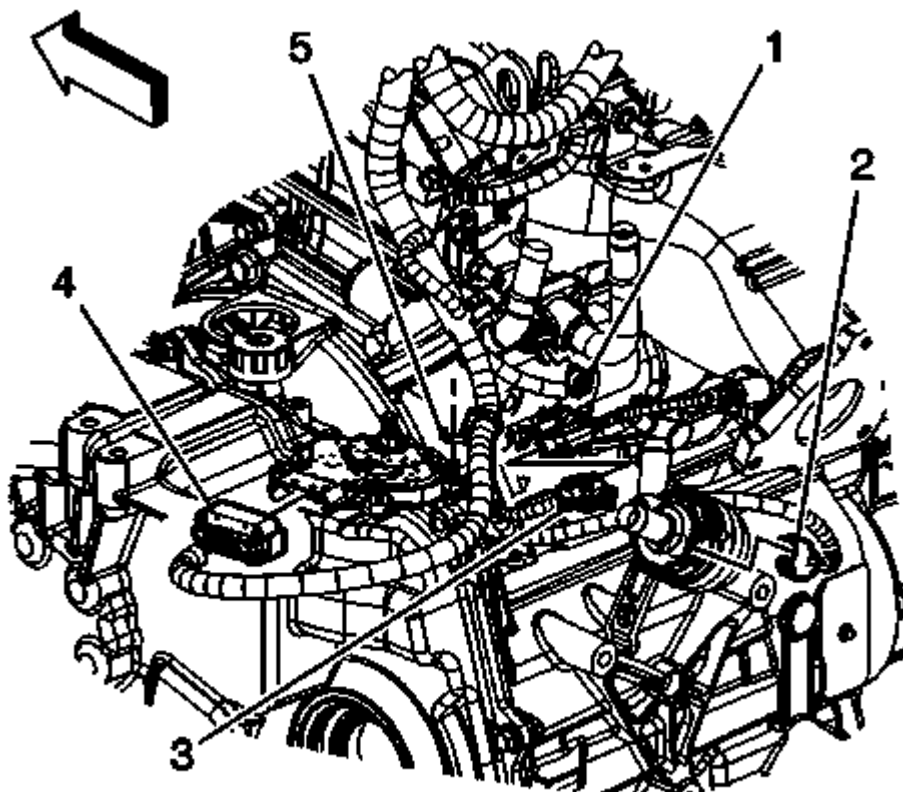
Identifying Starter Motor Bolts & Starter
